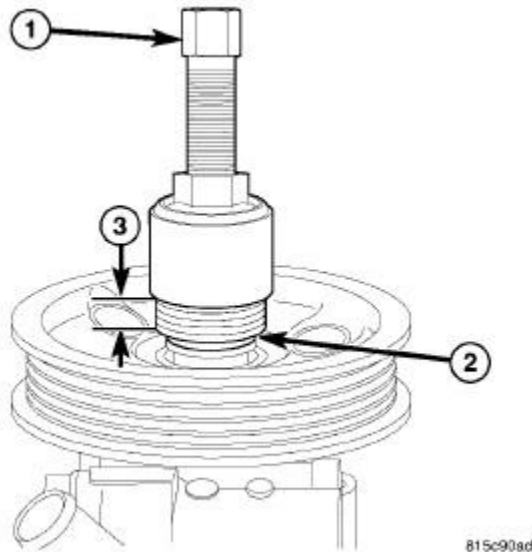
Install Pulley Using C-4063C, 6936 & Washers
